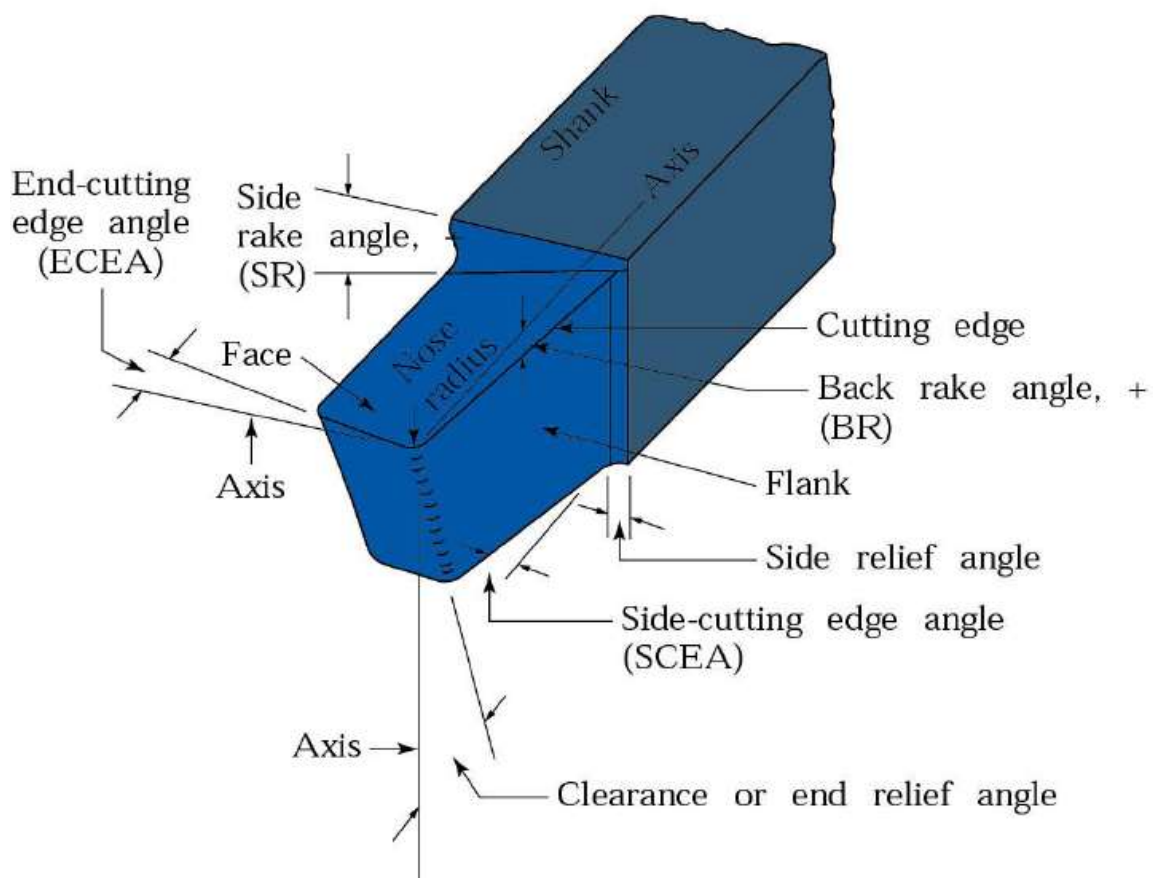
Single Point cutting tool geometry body parts and angles
